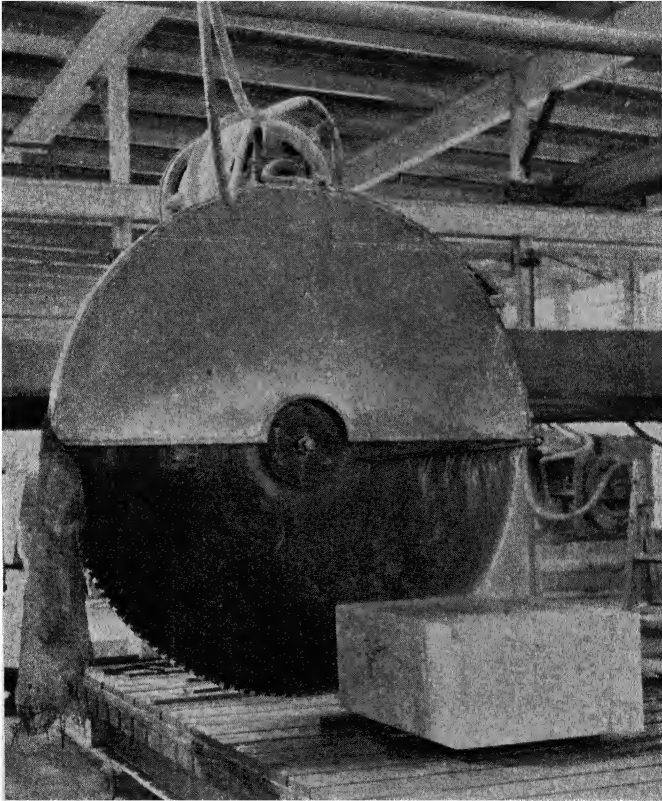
A diamond saw 6 feet in diameter equipped with 125 diamond teeth sawing a block of marble. (*Courtesy of Vermont Marble Company.*)
